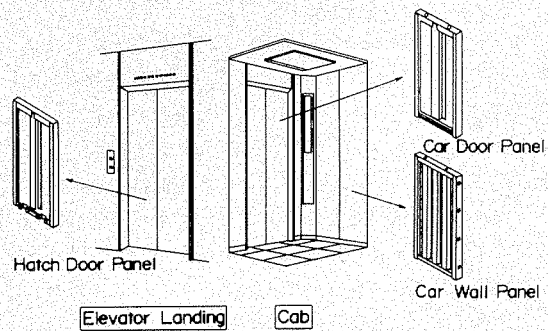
Decorative panels for elevators introduced new structural urethane adhesives.
